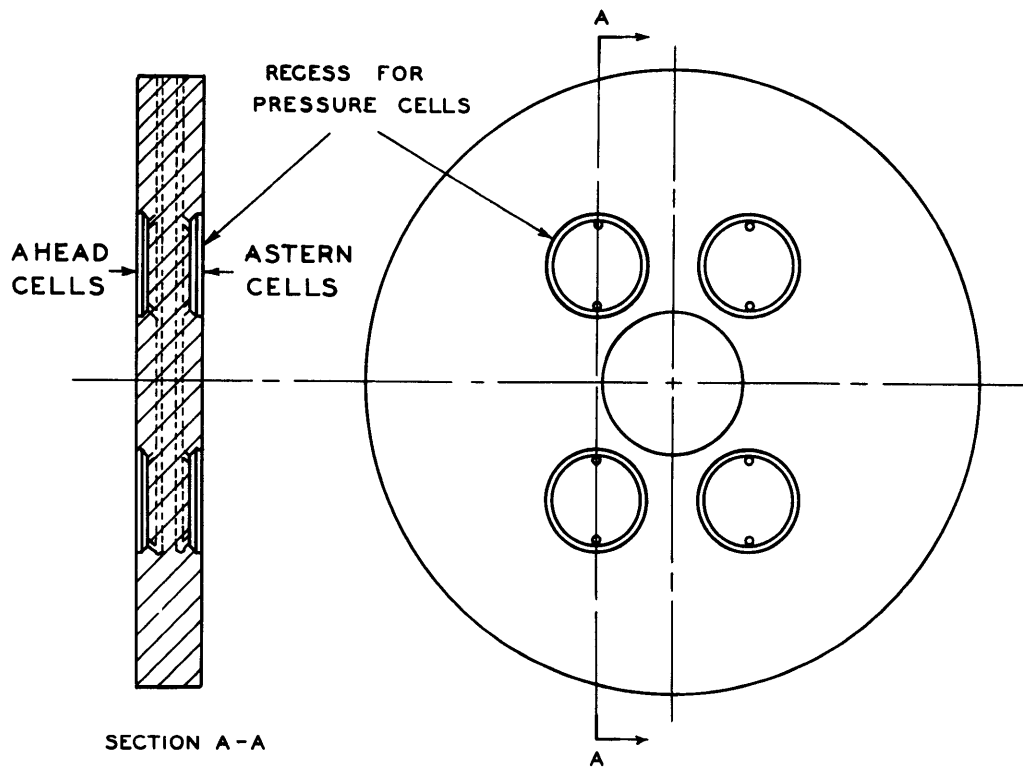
Sketch showing Arrangement for fitting Pressure Cells in End Cover.
